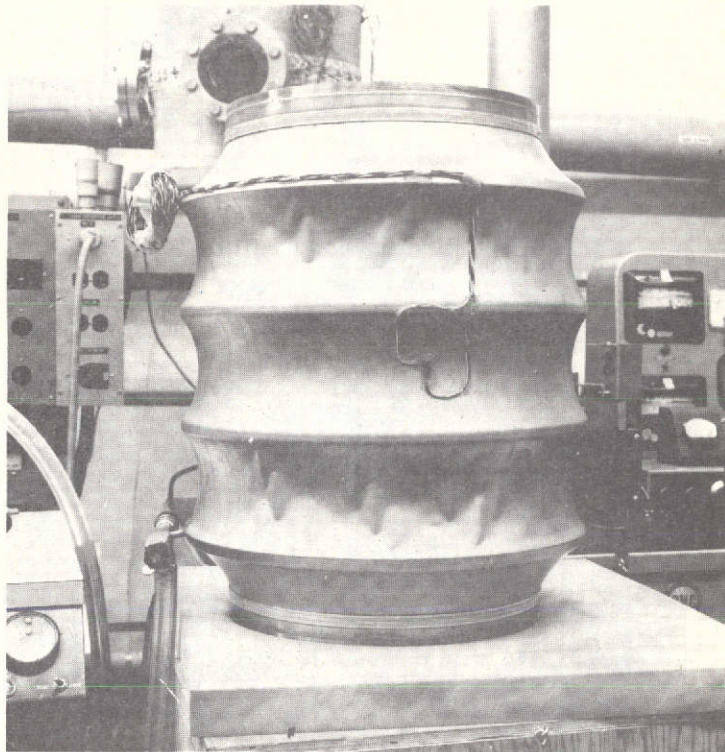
Assembly #2, Under Full Vacuum before Leak Check
